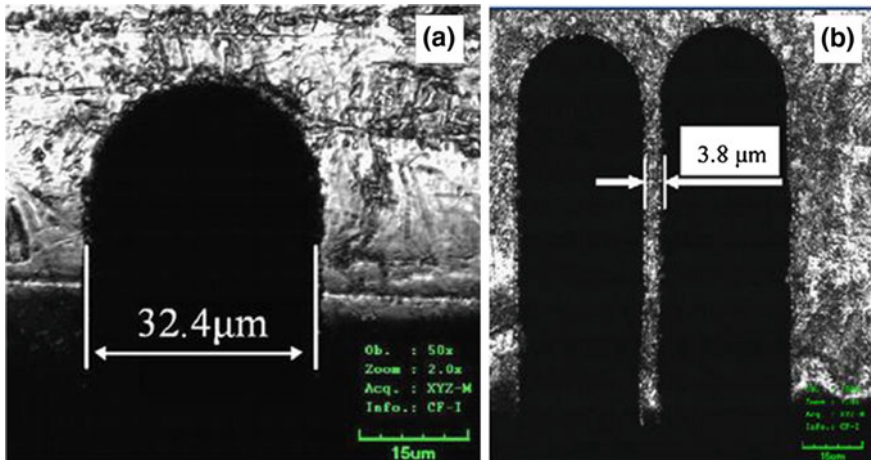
SEM photographs of various micro parts machined by MWEDM and used in micro fabrication [16]
